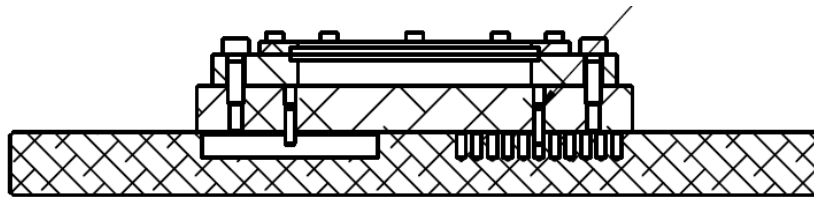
Cross section of the assembly drawing of the impact fixture
